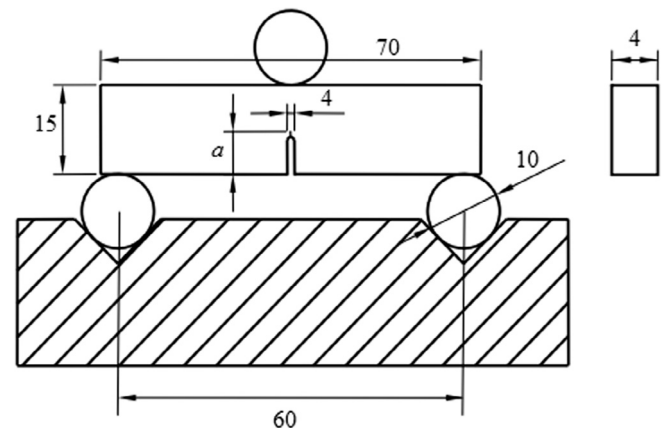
SENB (single edge notch bending) specimen and fixture dimensions for flexural test (dimensions in mm).
